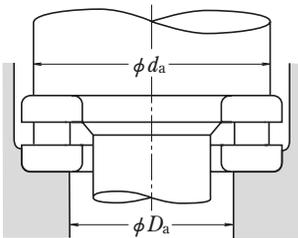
Face-Supporting Diameters for Thrust Roller Bearings
